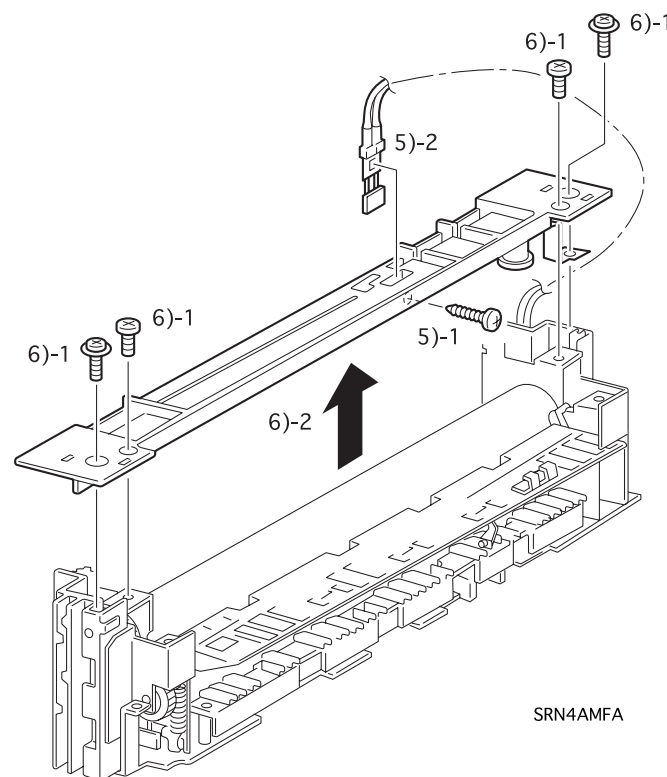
FUSER UPPER ASSEMBLY Removal
